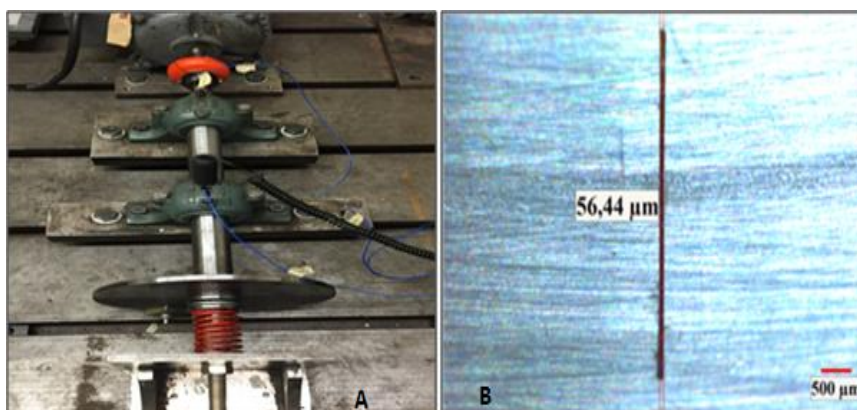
(A) Experimental setup, (B) A very small defect of outer race. The bearings used are "ball bearings, cylindrical and tapered bore" SKF brand and 1210 EKTN9 model. The bearings have induced defects (groove) of different sizes on the outer race. Since the objective of this study is the early detection of defects, grooves with very small width were artificially created by electro-erosion and measured with a microscope. Two healthy bearings and three defective bearings with groove widths of 50, 100 and 150 micrometers were used. The frequencies [1] symptomatic of the defect of the bearings are shown in (Tab. 1). Since the defect is located on the outer race, the amplitude of Ball Pass Outer Race (BPFO) frequency is expected to increase with the defect size.
